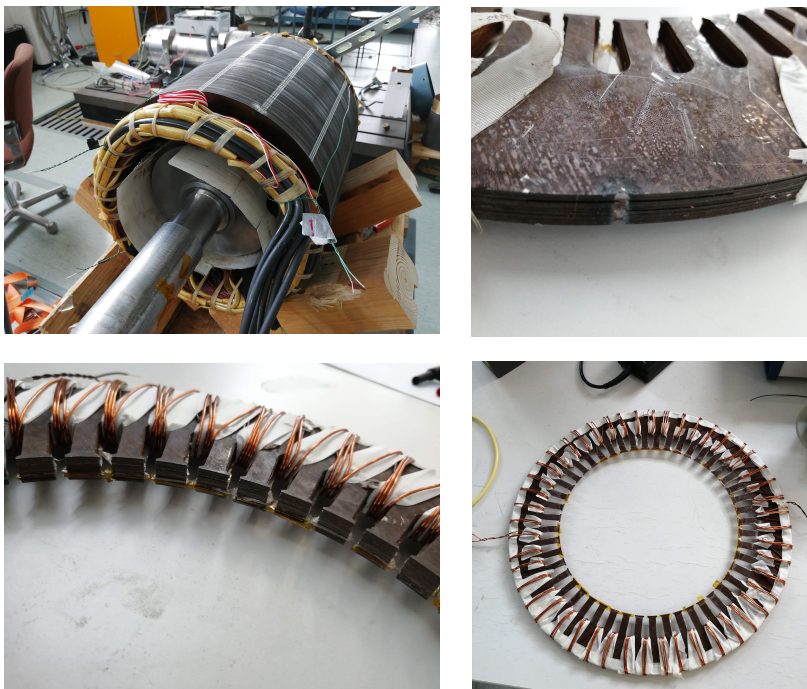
Pictures of setups for welding experiment: 37 kW induction machine with blocked rotor (top left), close-up of laser welding seam on sample stack (top right), stator stacks with double winding (bottom).
